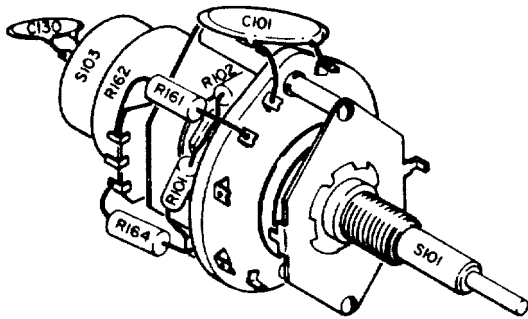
Sweep Mode/Trigger Source Switch Assembly, Location of Parts
